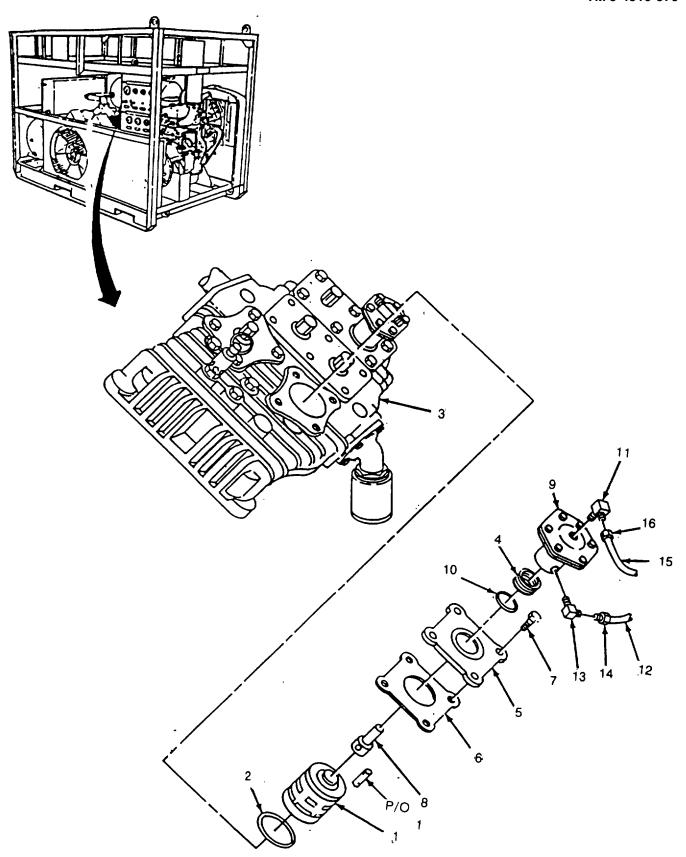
Compressor Unloader Assembly with 4 Bolt Flange, Installation.
